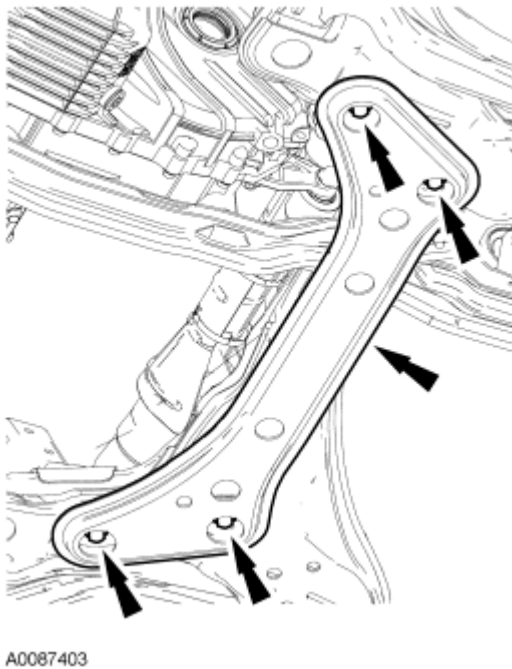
Identifying Lateral Support Crossmember And Bolts
